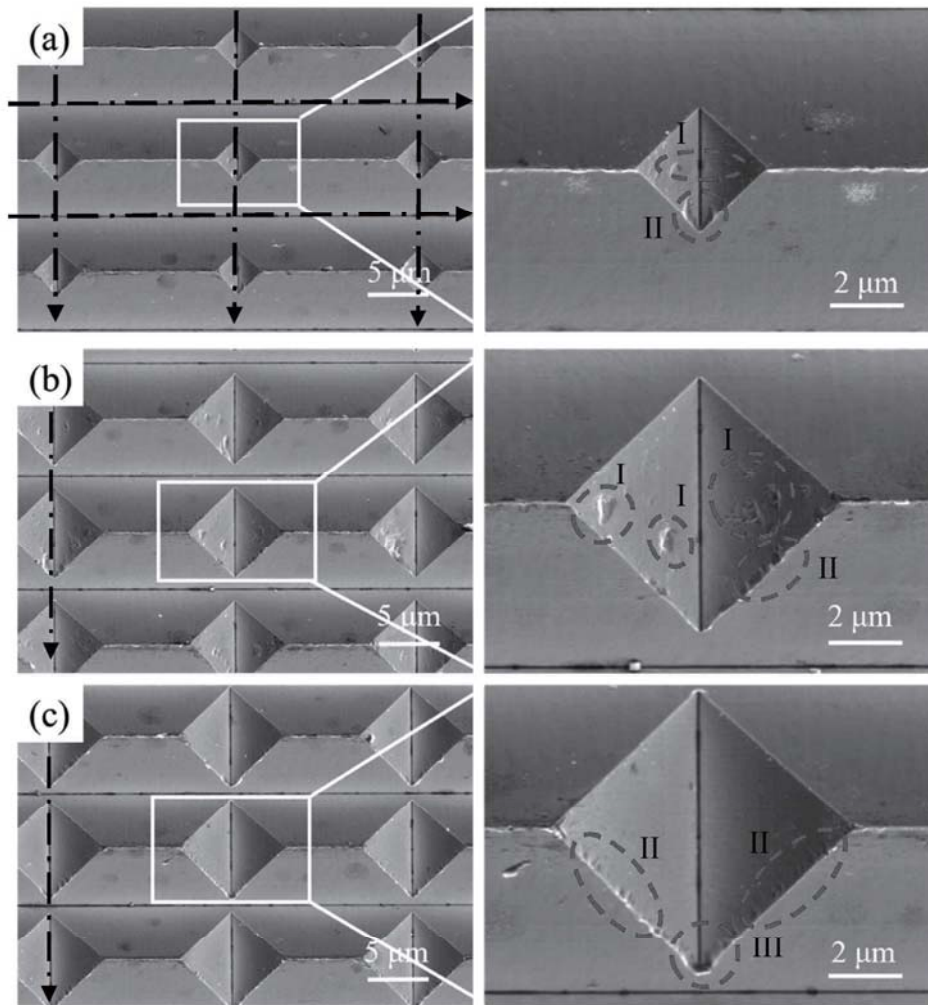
Microgrooves machined without laser assistance (a) the first cut (the cutting depth $d = 2.4 \mu\text{m}$); (b) the second cut ($d = 2.3 \mu\text{m}$); (c) the third cut ($d = 0.3 \mu\text{m}$). Defects are marked in the red circle (For interpretation of the references to colour in this figure legend, the reader is referred to the web version of this article).
